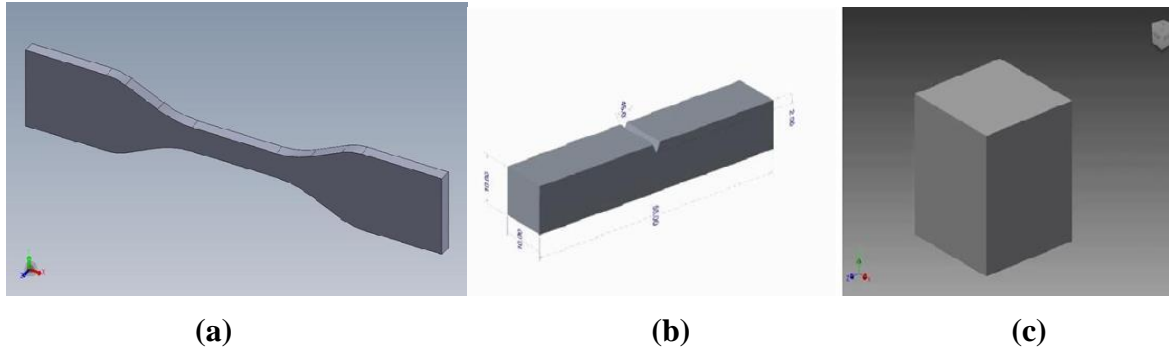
a) Tensile specimen model b) Impact test model c) Dimension accuracy test model
